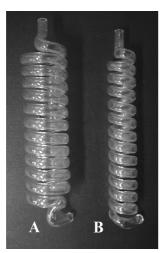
Helical coil-type heat exchangers fabricated with pyrex glass tube.
